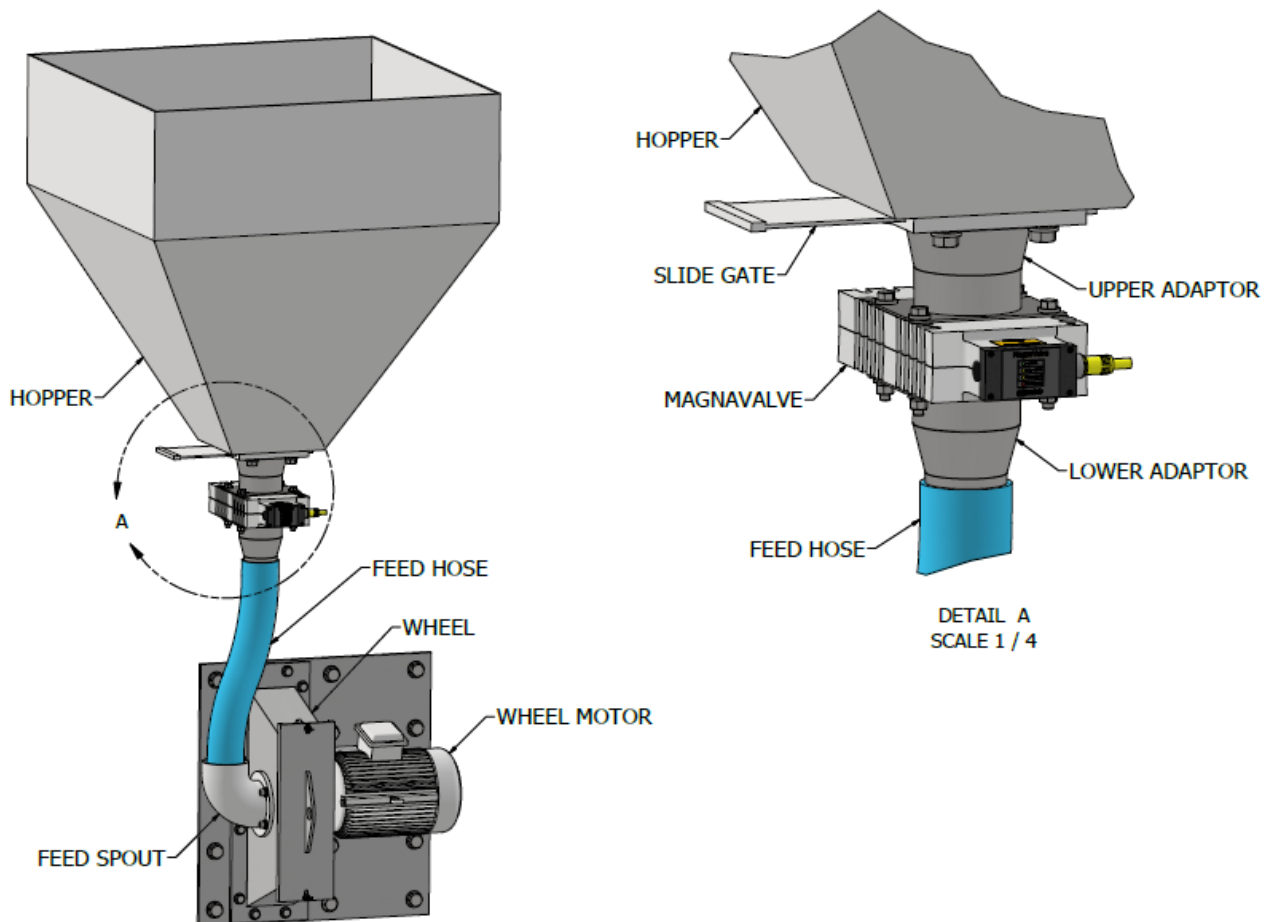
MagnaValve mounted at the hopper with feed hose to the feed spout. The upper adaptor is shown between the slide gate and the MagnaValve.
